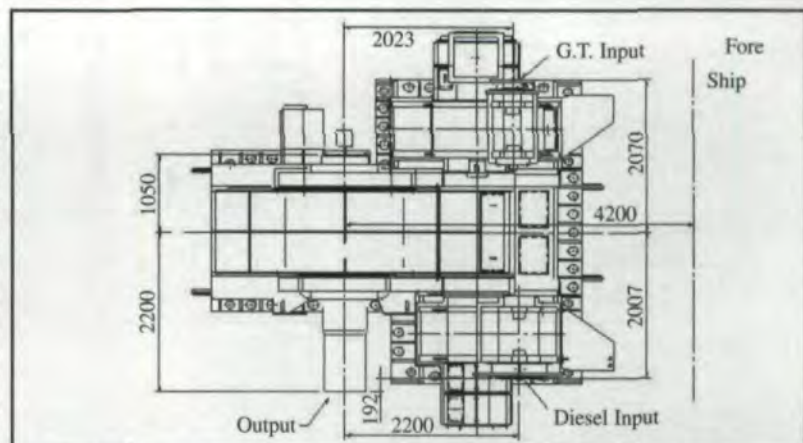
Top view of the portside gearbox. All dimensions in millimeters.
